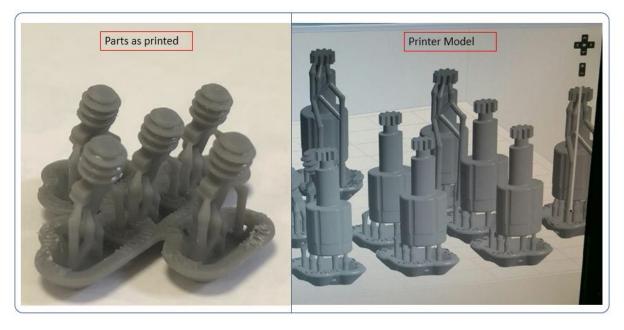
Ultimaker 2 parts as made and in setup for 3-D print.
